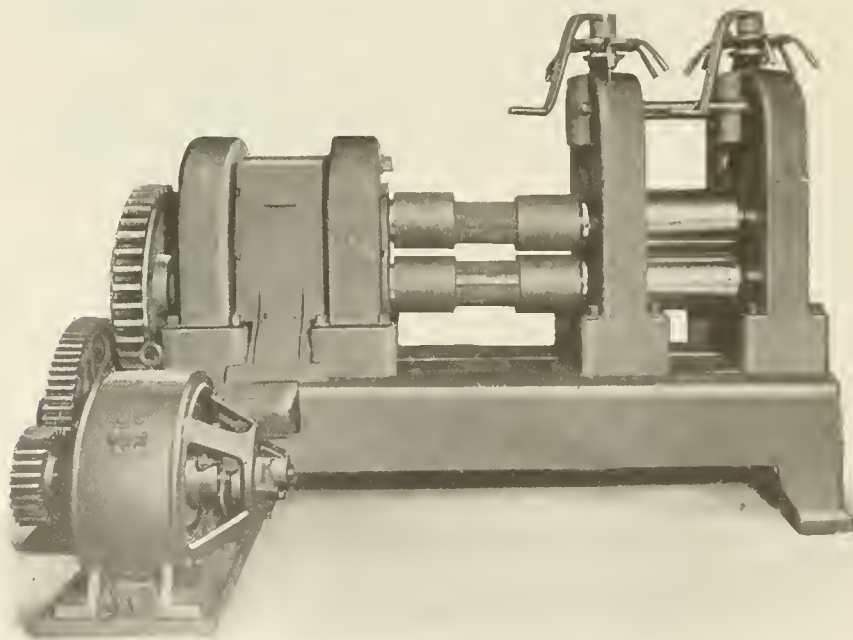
Electrically-driven Rolling Mill, built by the Standard Machinery Co.
